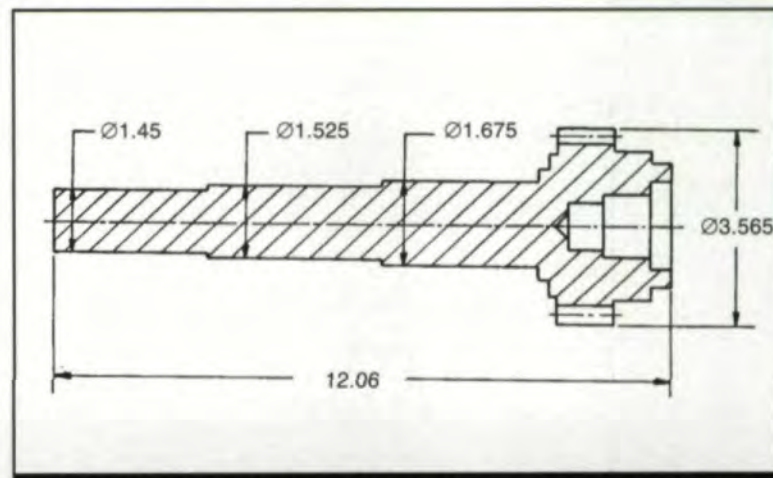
Transmission countershaft with a gear on one end of the shaft.
